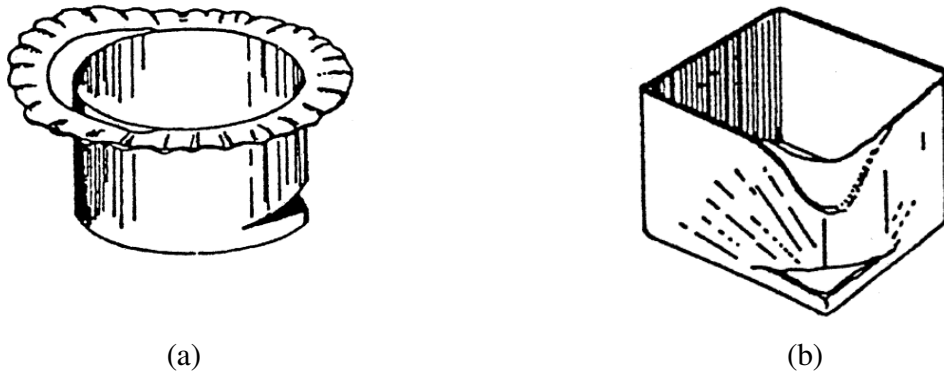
(a) Bottom fracture in the circular cup, and (b) corner fracture in the square cup, during deep drawing process (Banabic, 2010).
